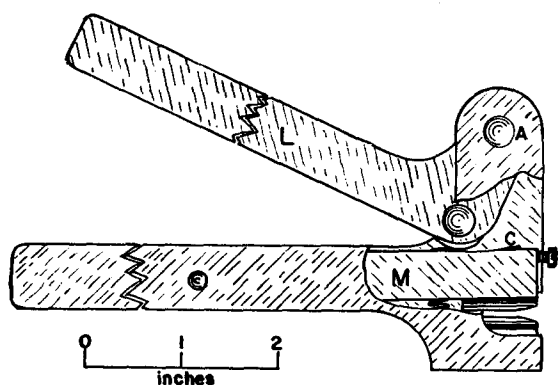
The pinch-off tool is designed to give a large mechanical advantage when the jaws are nearly closed. Such a tool will pinch off copper tubing of up to $\frac{1}{8}$ -in. o.d., giving a diffusion weld.
